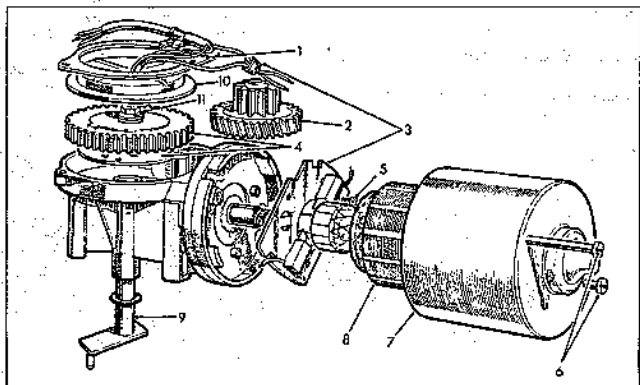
Windscreen wiper motor - exploded view (Sec 35)
